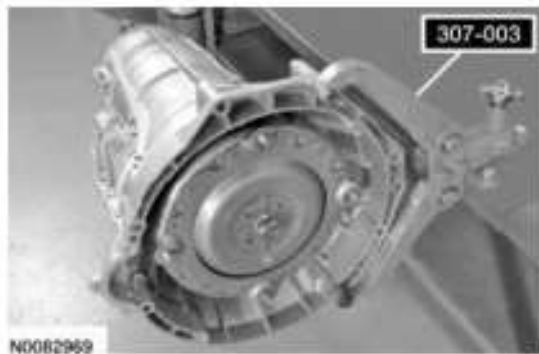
Identifying Transmission Holding Fixture 307-003 On Torque Converter Housing
